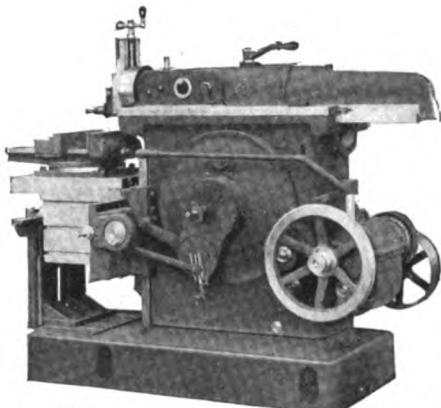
18, 29, 24 and 26-Inch Sizes. Gear Boxes with Constant Speed Pulley Drive
